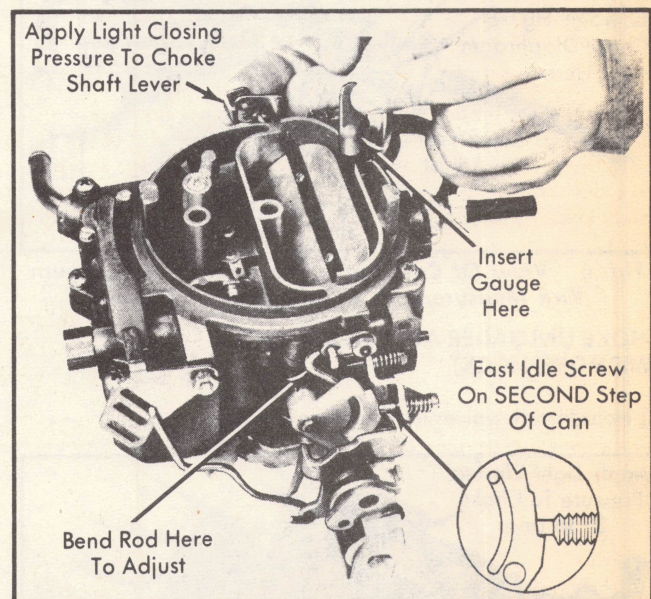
Using Gauge To Measure Choke Valve Clearance For Fast Idle Cam Adjustment
